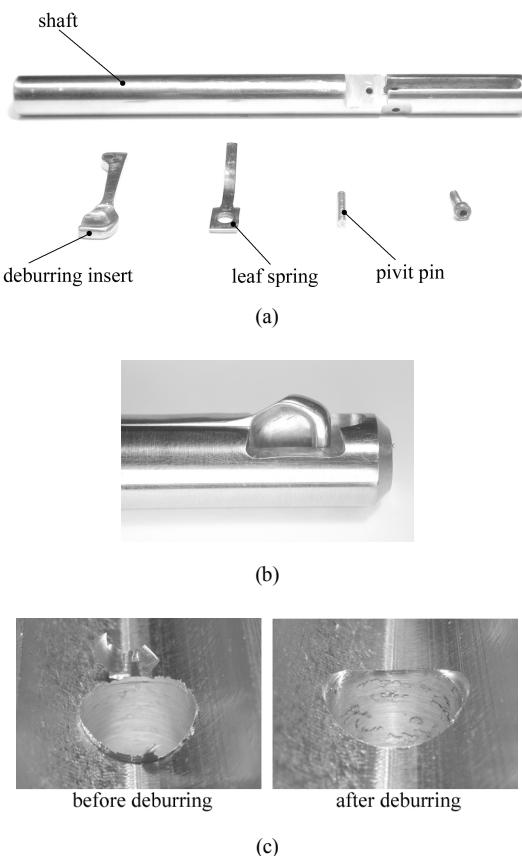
The first design of the deburring tool [8]: (a) components, (b) assembly, (c) deburring of the intersecting edge of Al6061-T6: Primary hole dia. 18 mm; Secondary hole dia. 10 mm; Intersecting angle 90°.
